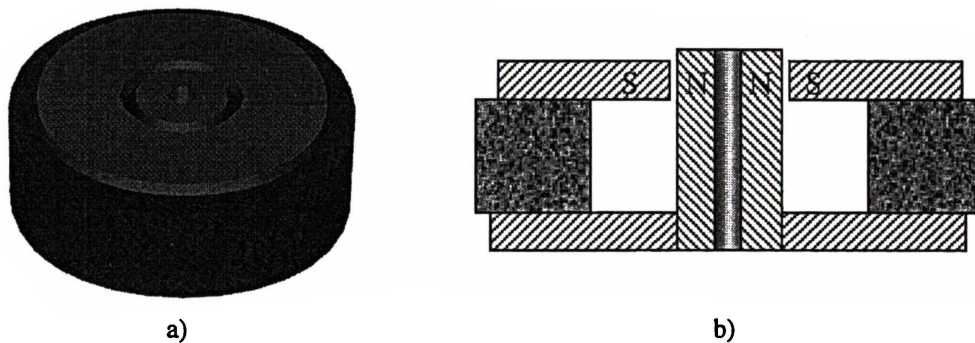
Keeper/magnet/pole-piece assembly. a) Assembled view b) Cross section
